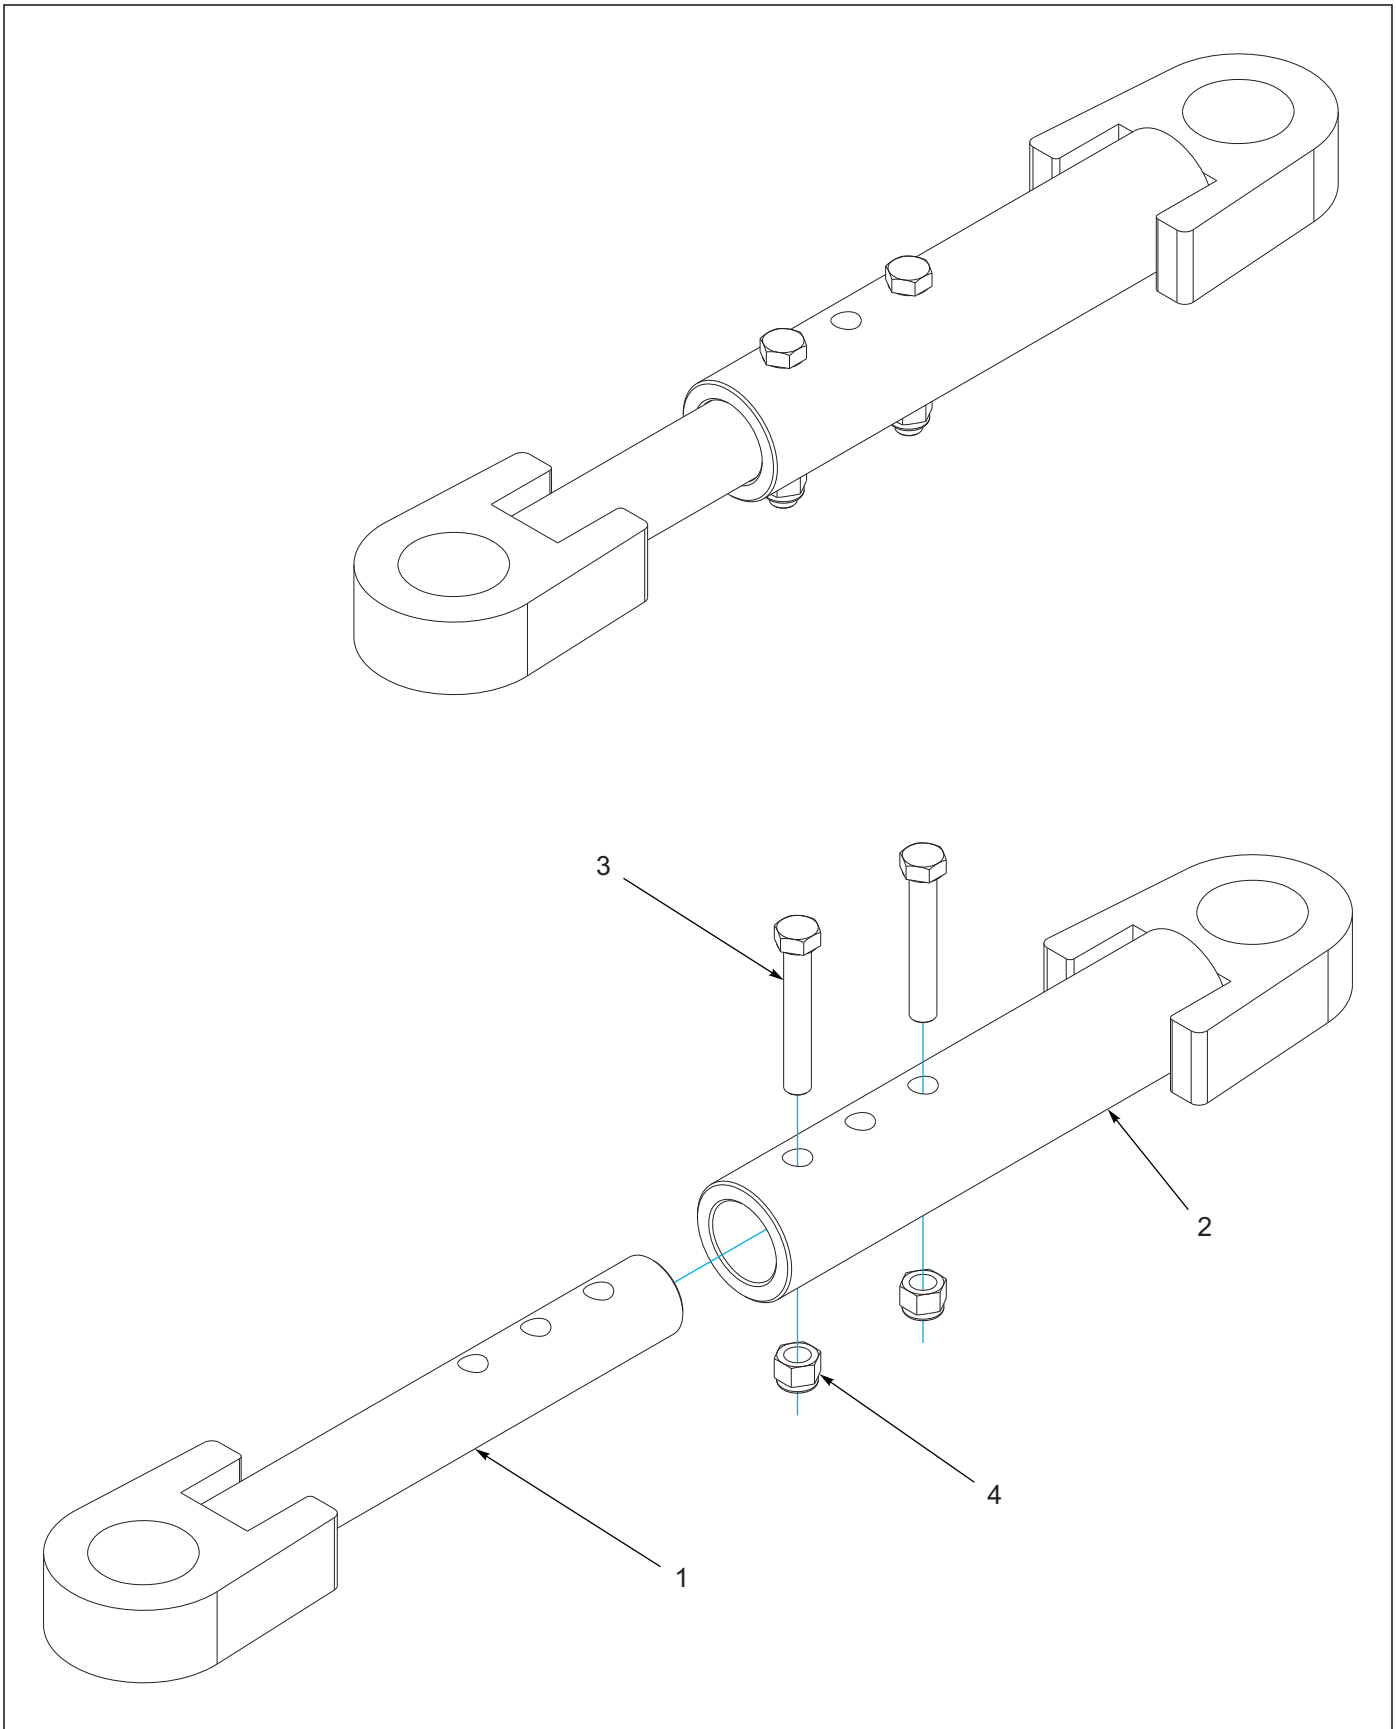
Side Draft Assembly - Manual (After 8-31-2018)
